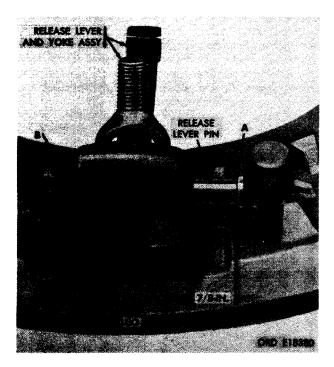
REMOVING OR INSTALLING RELEASE LEVER PIN.
